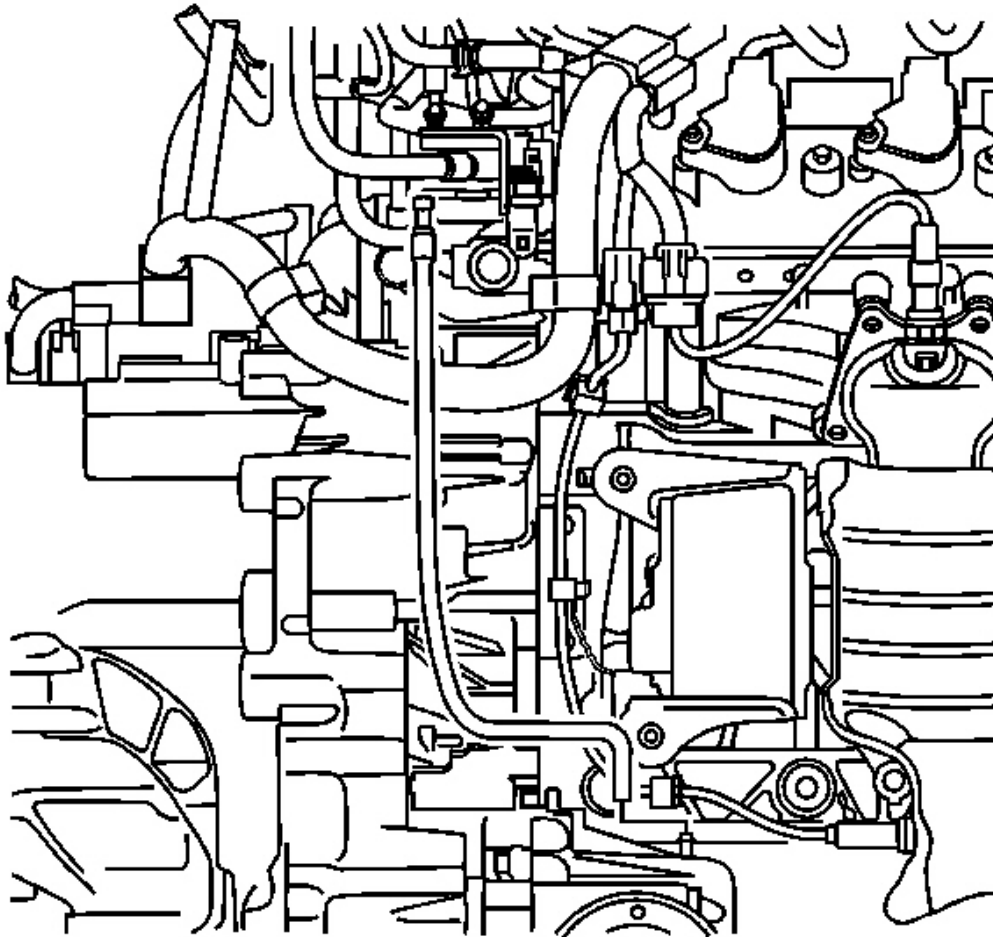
Removing/Installing Vent Hose From The Transfer Case Assembly
